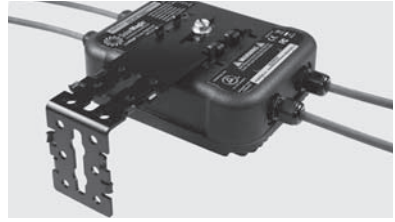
Universal Mounting Bracket Securely Fastened in Place
